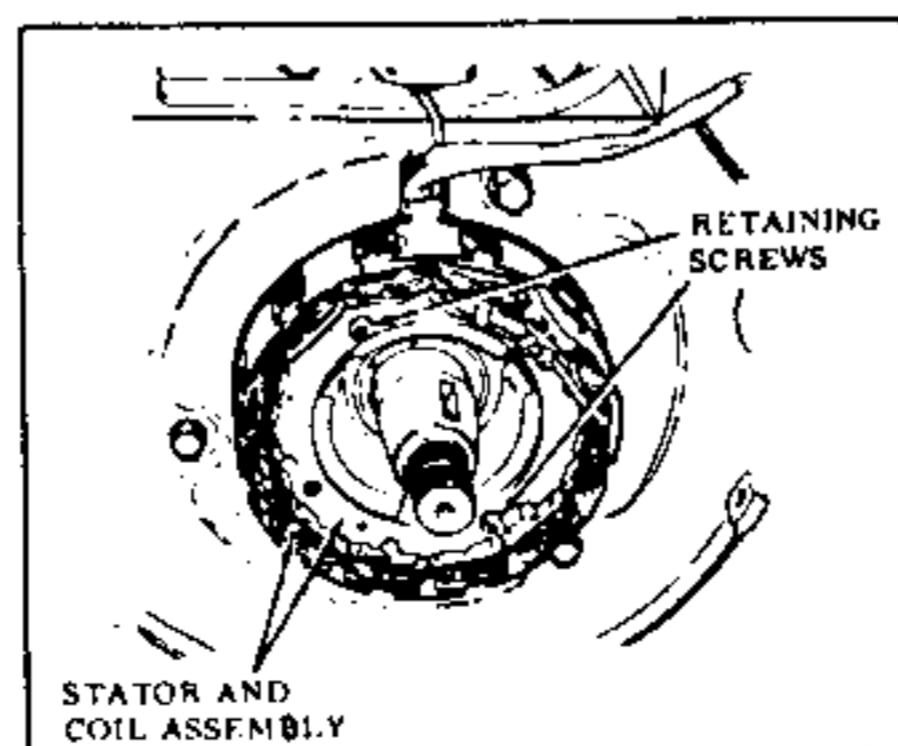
Ignition generator coil and stator is serviced only as an assembly.
